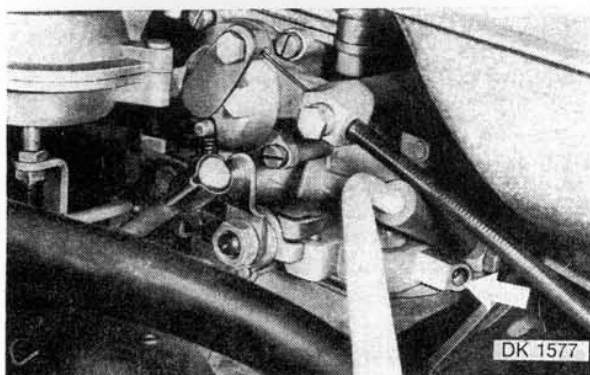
/10 - Fast-idling Screw - access to it is closed with a plastic plug
